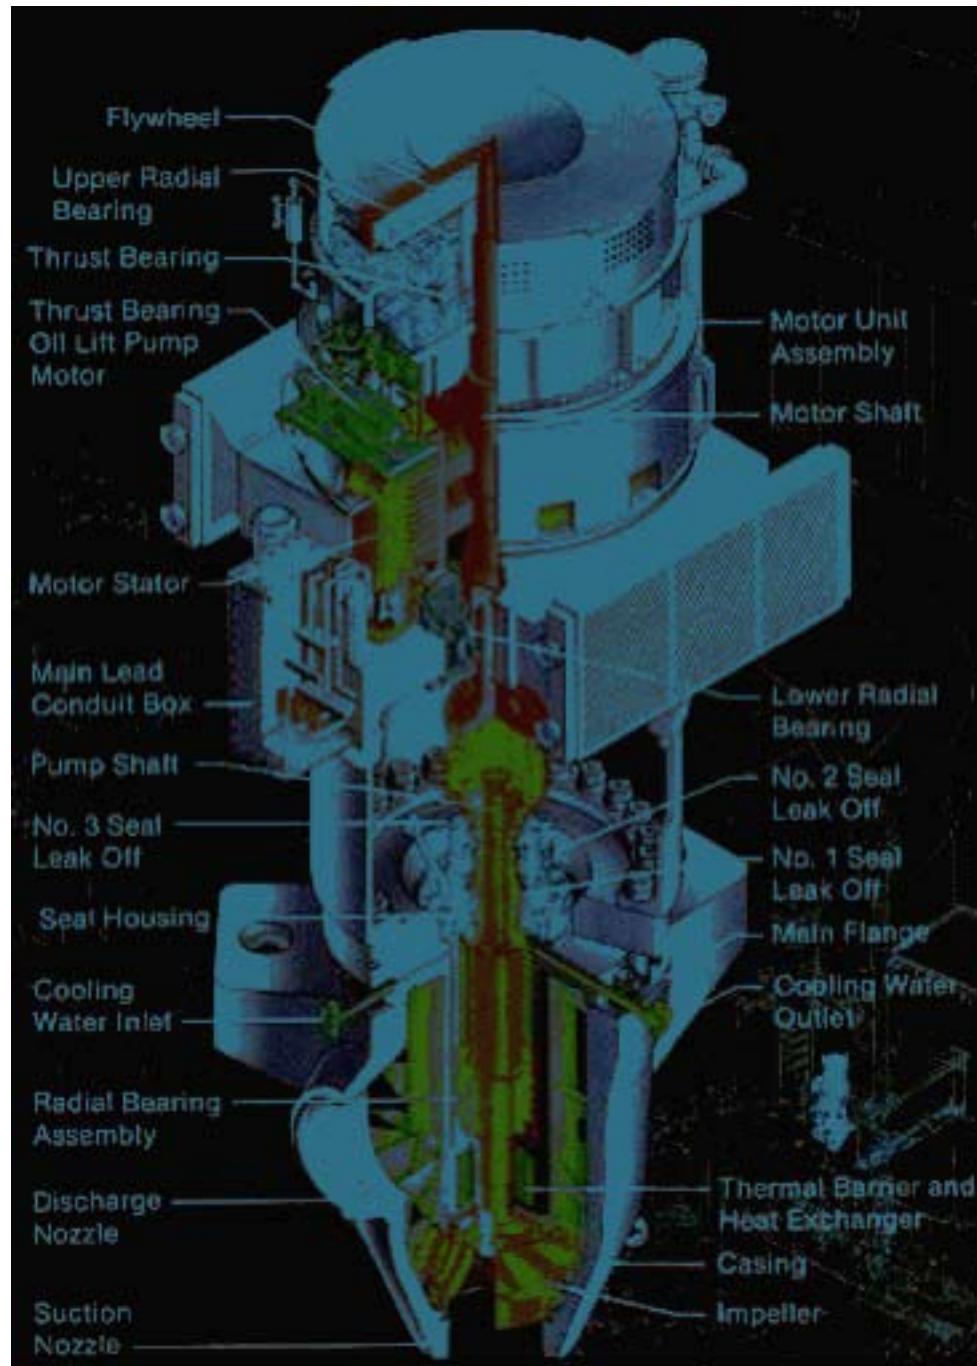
Typical Westinghouse-Style Reactor Coolant Pump and Motor
